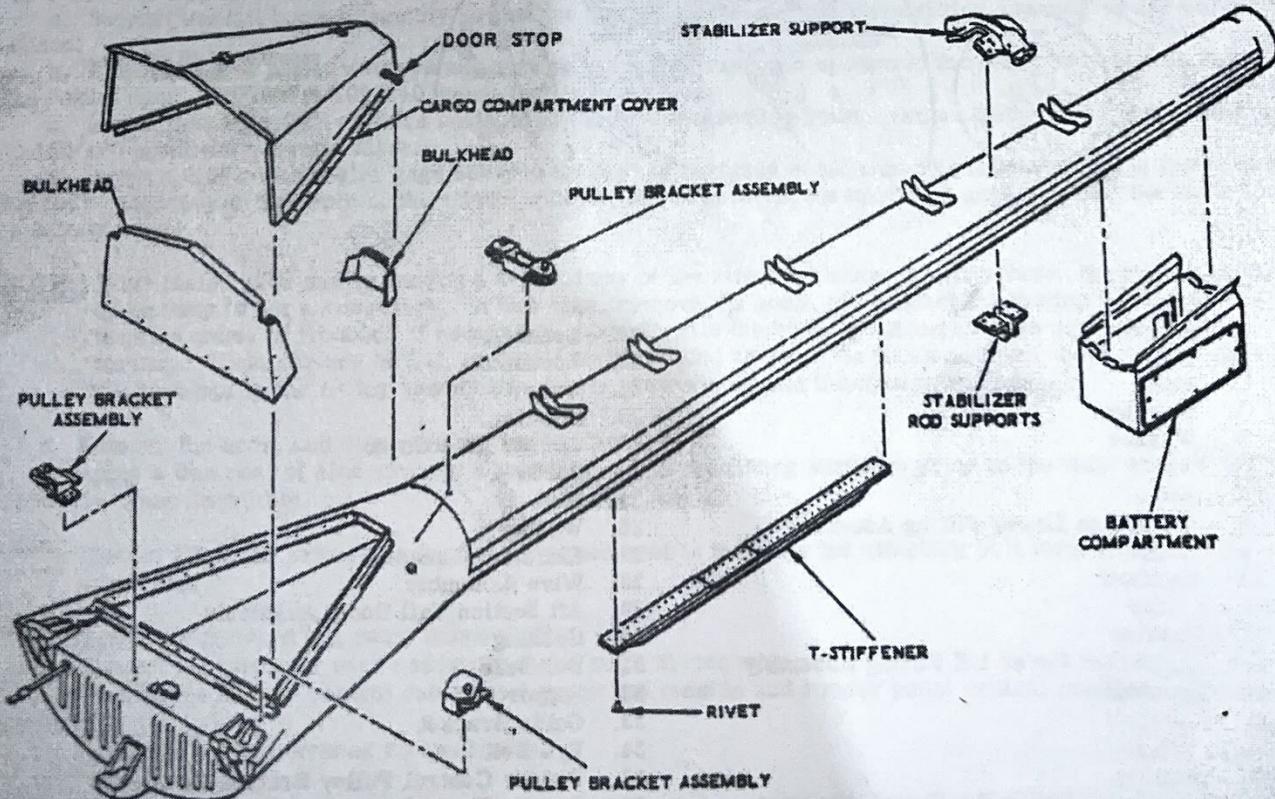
Tail Boom Assembly, Four-Place Configuration
